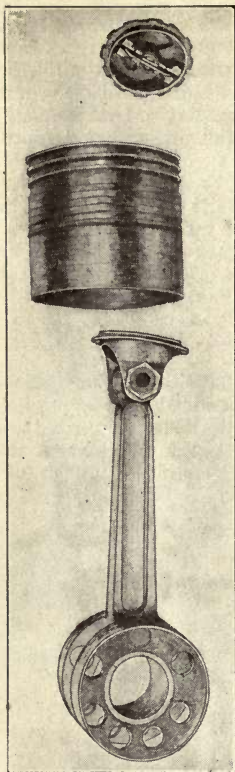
The piston, main connecting rod, and inlet valve of the Gnome engine.
